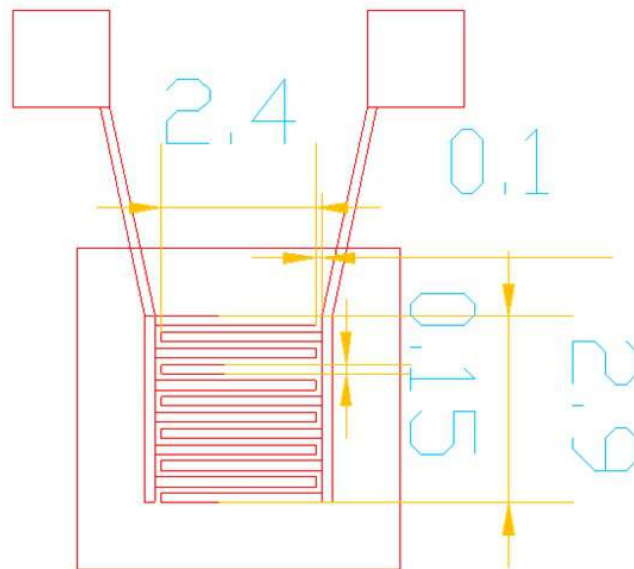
Computer aided design drawing of the inter-digitated finger electrodes used in the fabrication of gas sensor devices with a device area of about 7.5 mm^2 . The dimensions shown are in millimetres.
